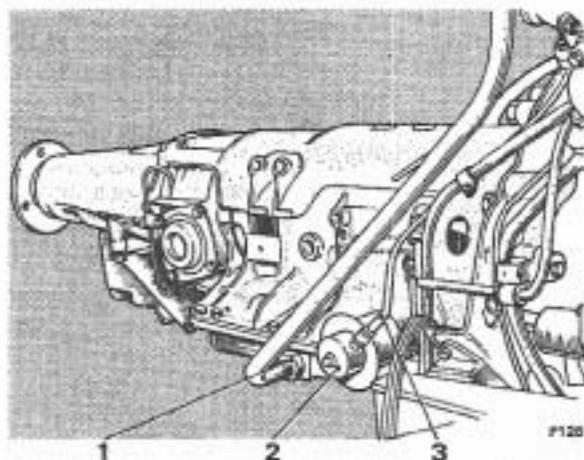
VACUUM MODULATOR AND VACUUM PIPE
